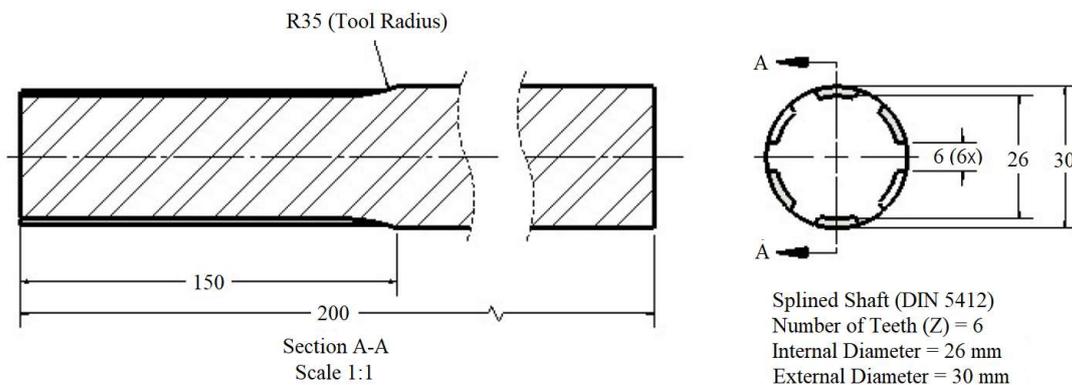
Workpiece manufactured by hobbing (Rheinheimer, 2018)
